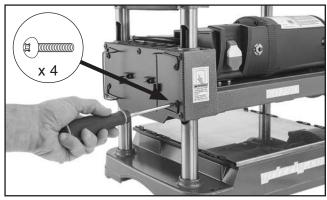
Cord wraps installed with #2 Phillips head screwdriver.
